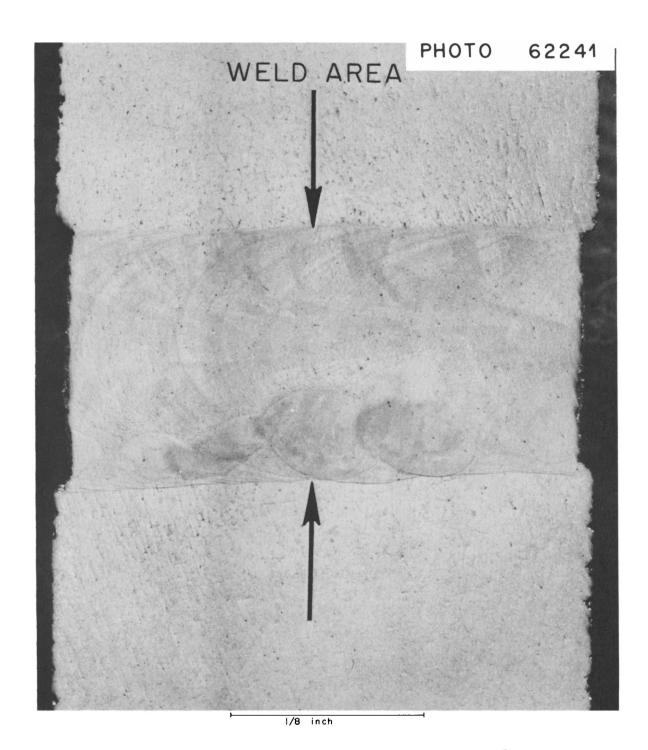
Selective Corrosion of Weld Filler Metal 61 by Aqueous Cleaning Solutions. Vertical faces were flat before exposure to solutions.
